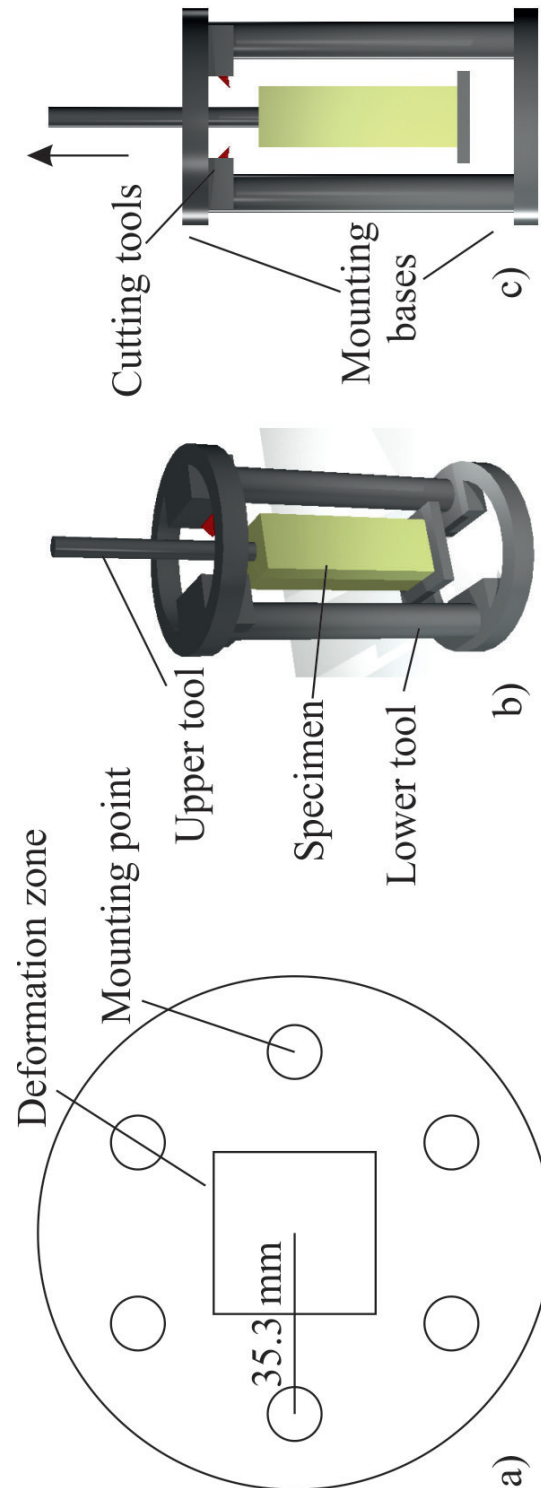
a) Schematic depicting mounting base and mounting point arrangement b) perspective view of CAD design Mk I OCR c) Cross section of Mk I OCR, indicating direction of movement.
